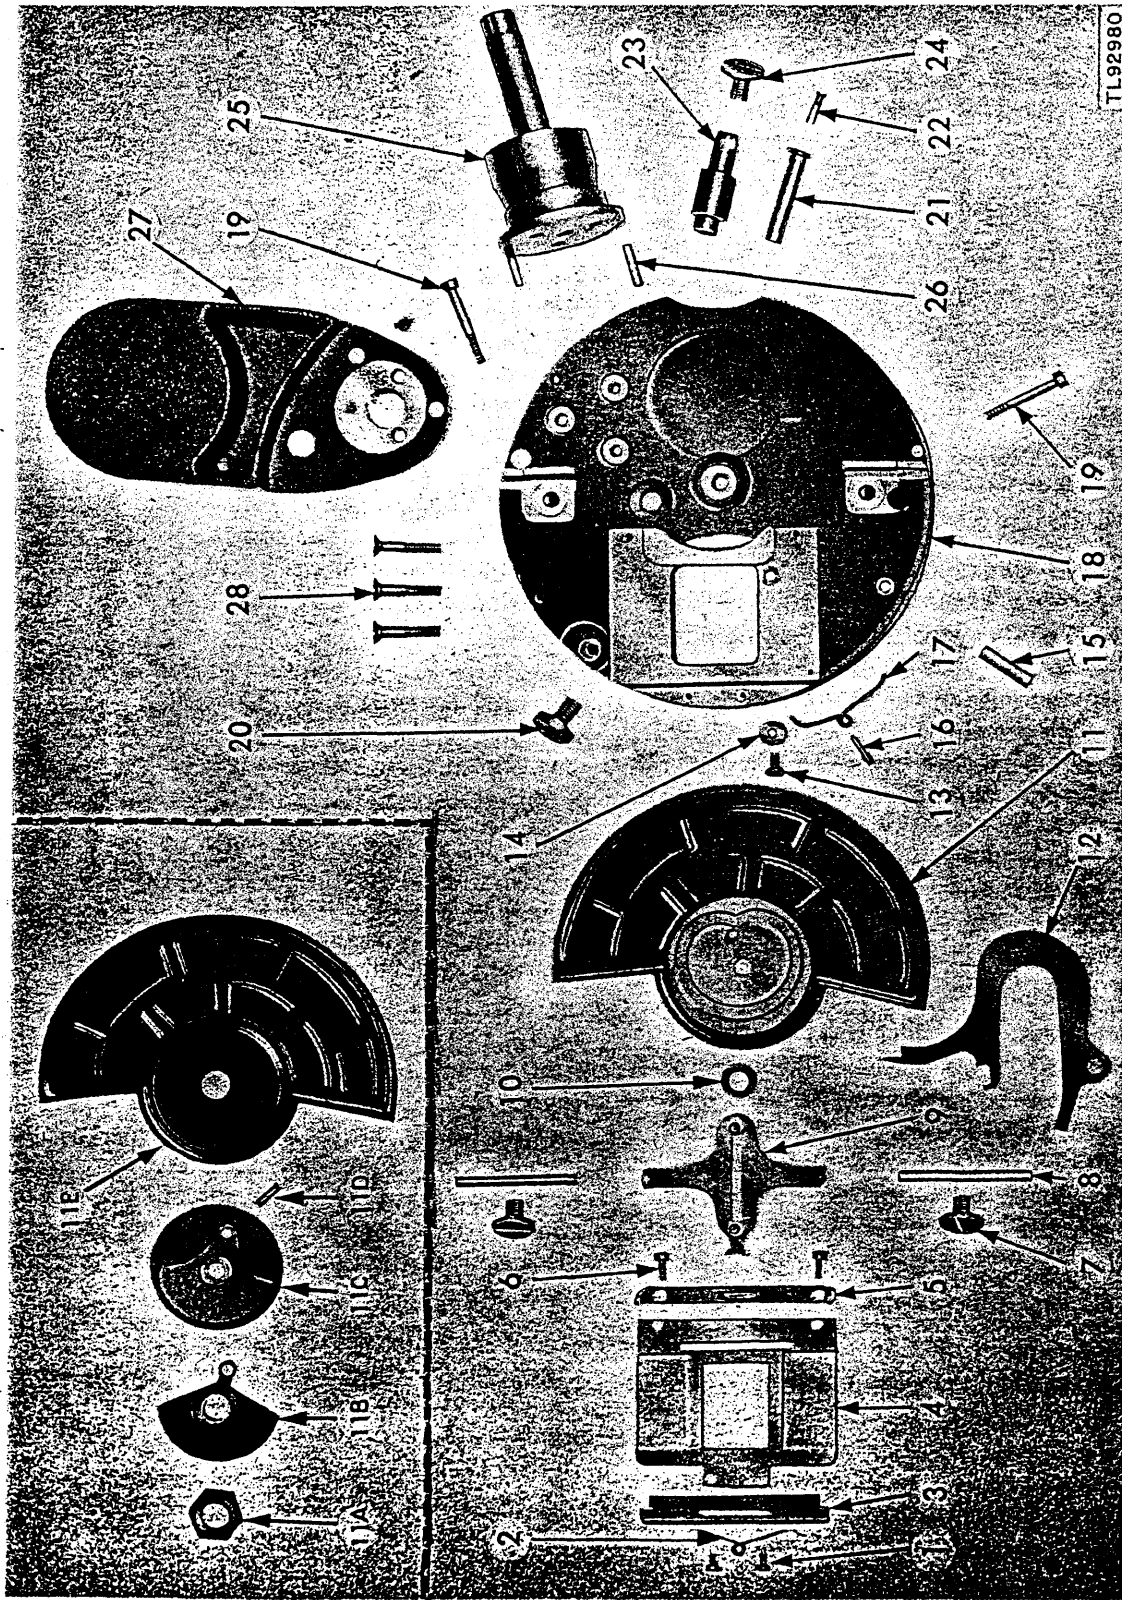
Disassembly, camera head mechanism, Cameras PH-330-A, -G, and -H, showing shutter and cam disassembly.
